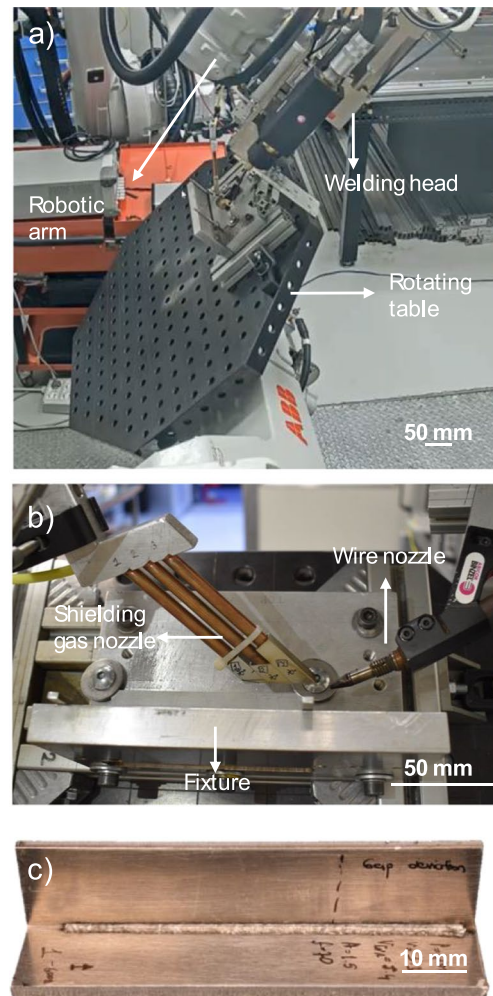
Details of the experimental setup showing a welding configuration during a corner-joint weld, b the gas and wire nozzle arrangements on the fixture, and c macro image of a corner-joint weld
